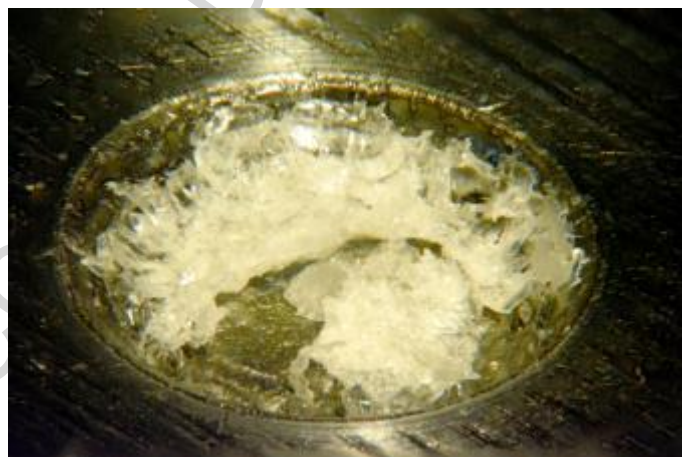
Macrograph of PC material entangled within a grooved die after joining
